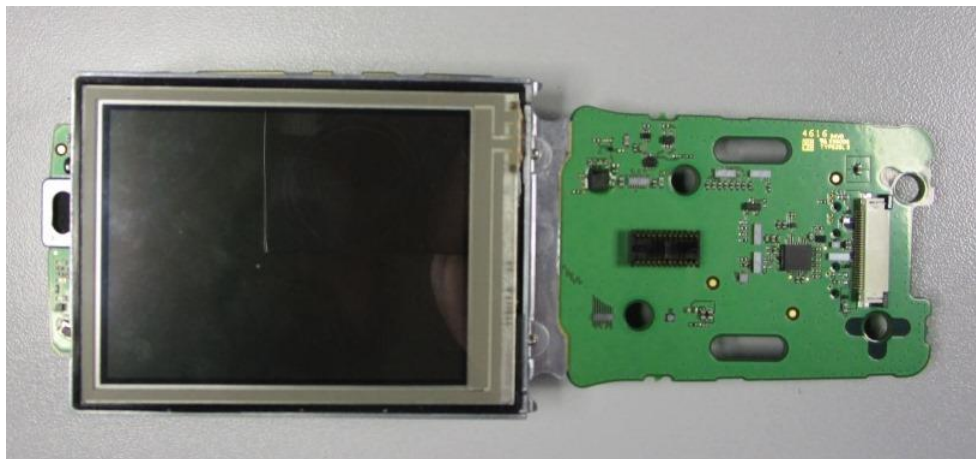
SKORPIO X4 – Internal PCB Overview-Front Side
